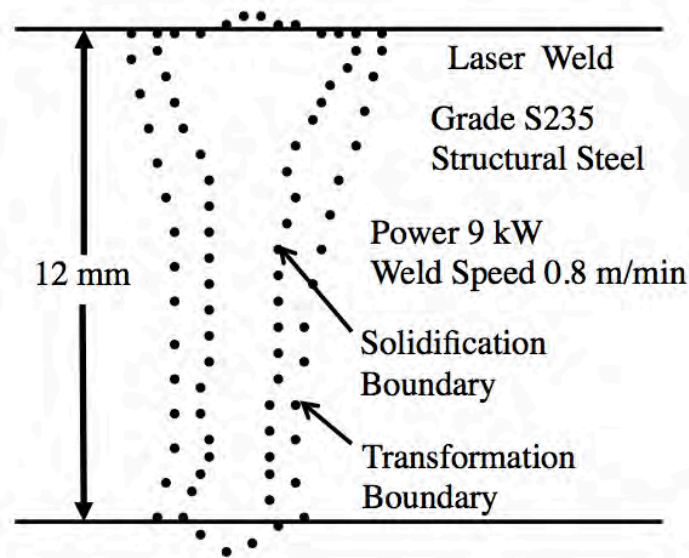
Experimentally measured transverse weld cross sections of solidification and HAZ-edge boundaries for steel laser weld, where $V=1.333$ cm/s (Weld 1).
